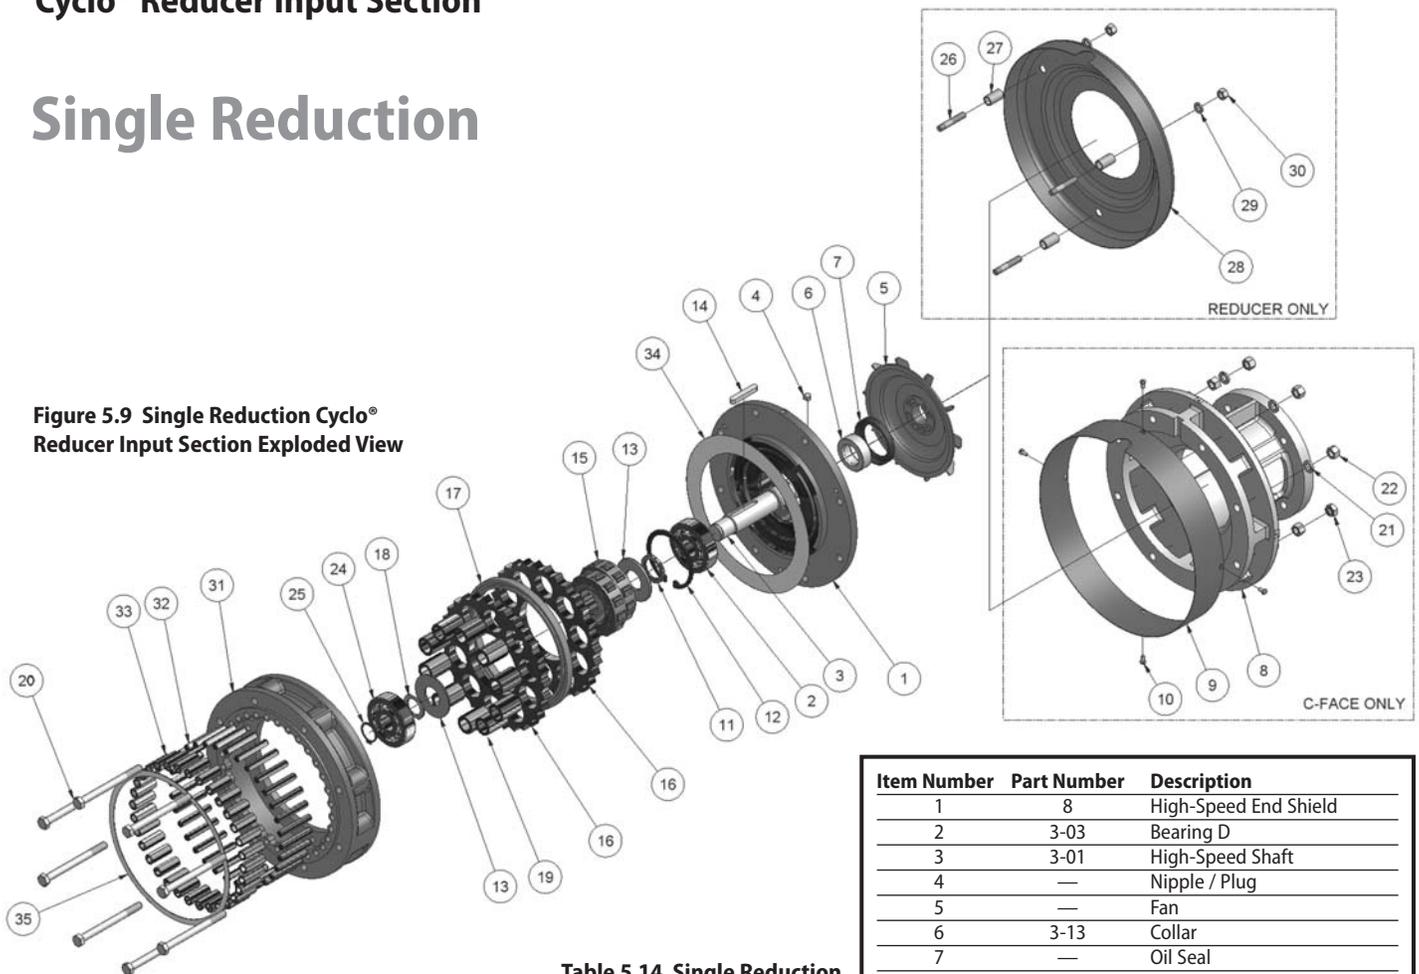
Single Reduction Cyclo® Reducer Input Section Exploded View
